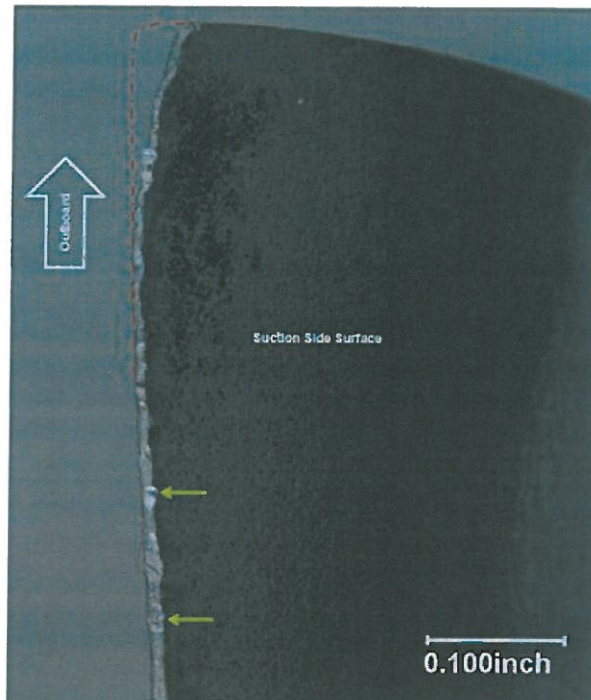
Representative corrosion pitting (Photograph courtesy of Rolls-Royce Corporation)
